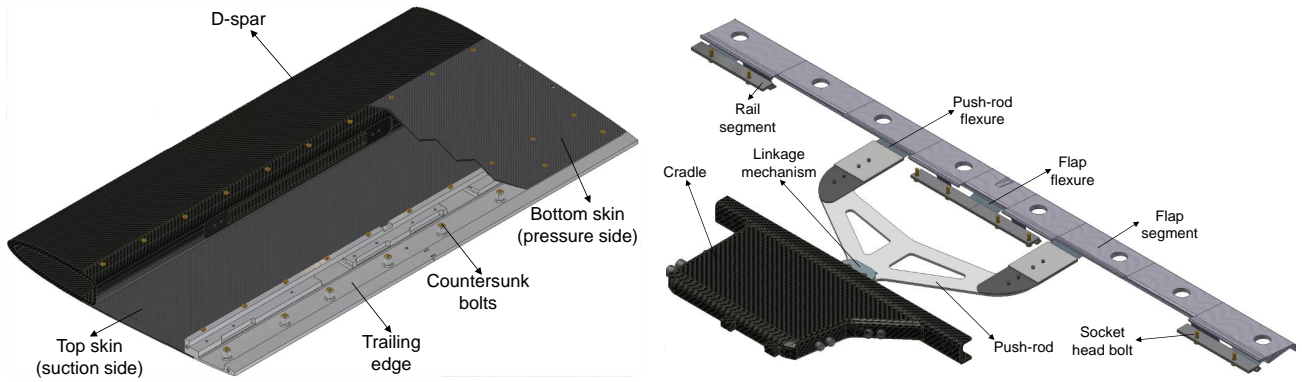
Left: Interrupted view of the blade aerofoil section with the AGF mechanism removed; Right: Isometric view of the AGF mechanism.
